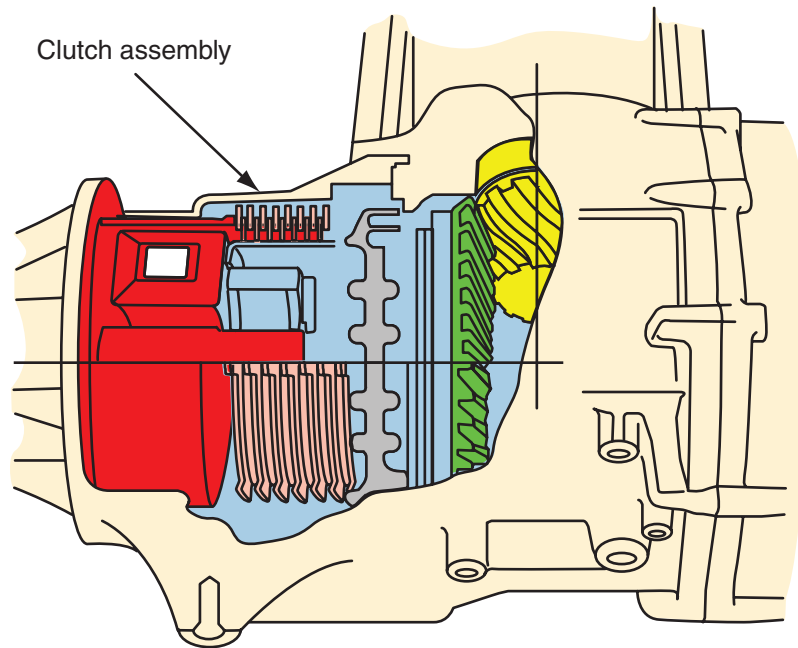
A mechanical clutch assembly for a center differential.
